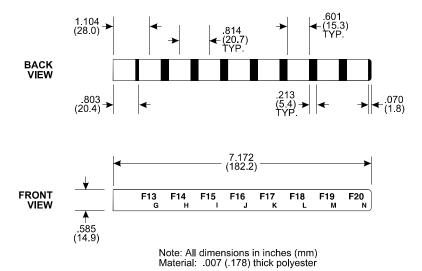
3408KP F13-F20 Insert Dimensions
